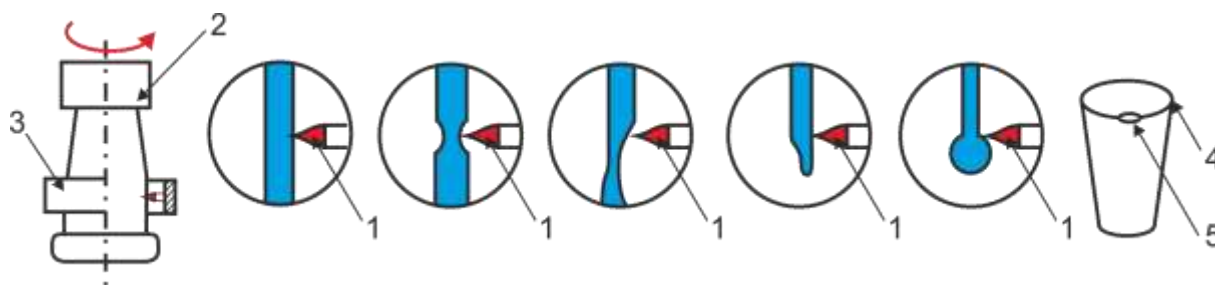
Principle of moil burning-off operation: 1 - flame, 2 - clamping head, 3 - circular burner, 4 - reinforced edge, 5 - tear
